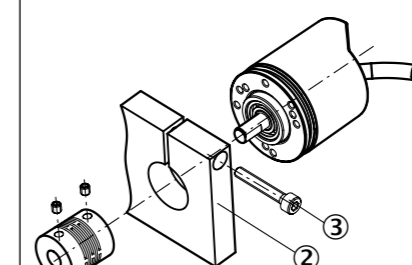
Installation DBS36 Face mount flange with servo-clamps
